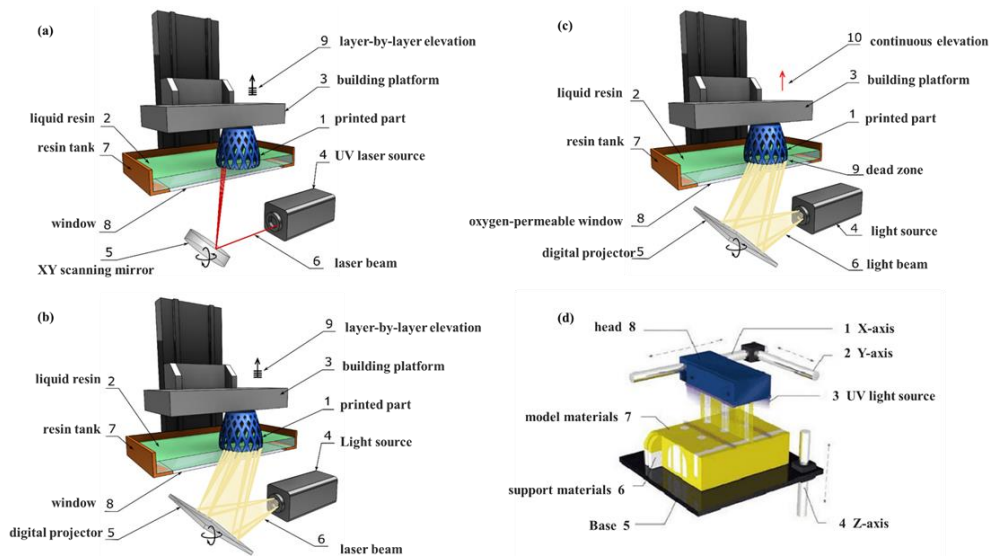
Components of a typical (a) SLA machine; (b) DLP machine; (c) CDLP/CLIP machine [76]; (d) Polyjet machine [80].
